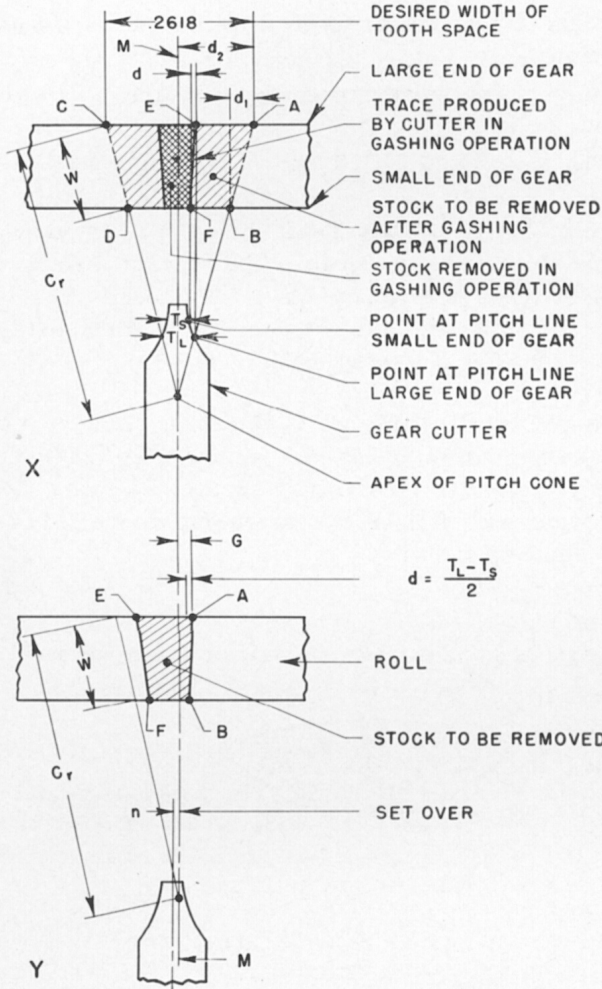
Geometrical relation between gear and cutter tooth to determine angle of roll.
